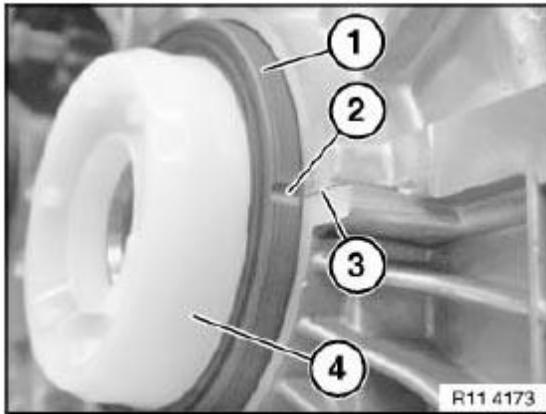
Fitting Support Sleeve With Radial Shaft Seal On Crankshaft
